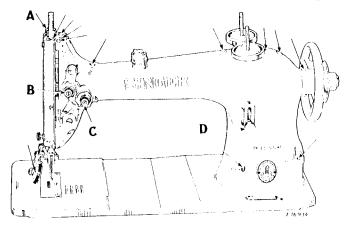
Oiling Points At The Front Of The Machine Also Adjustments On The Machine
